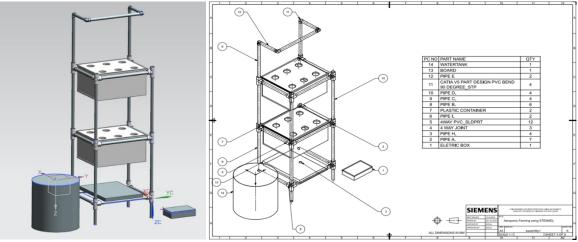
Aeroponic prototype 3D view and engineering drawing
